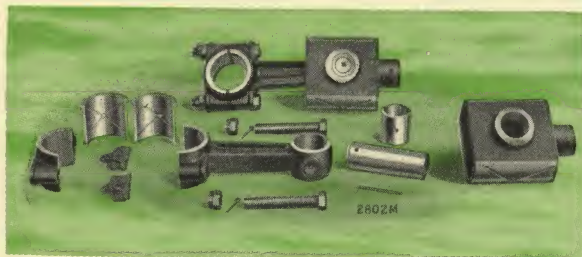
Connecting rod and cross head details of 5000 gallon per hour Typhoon pump.
